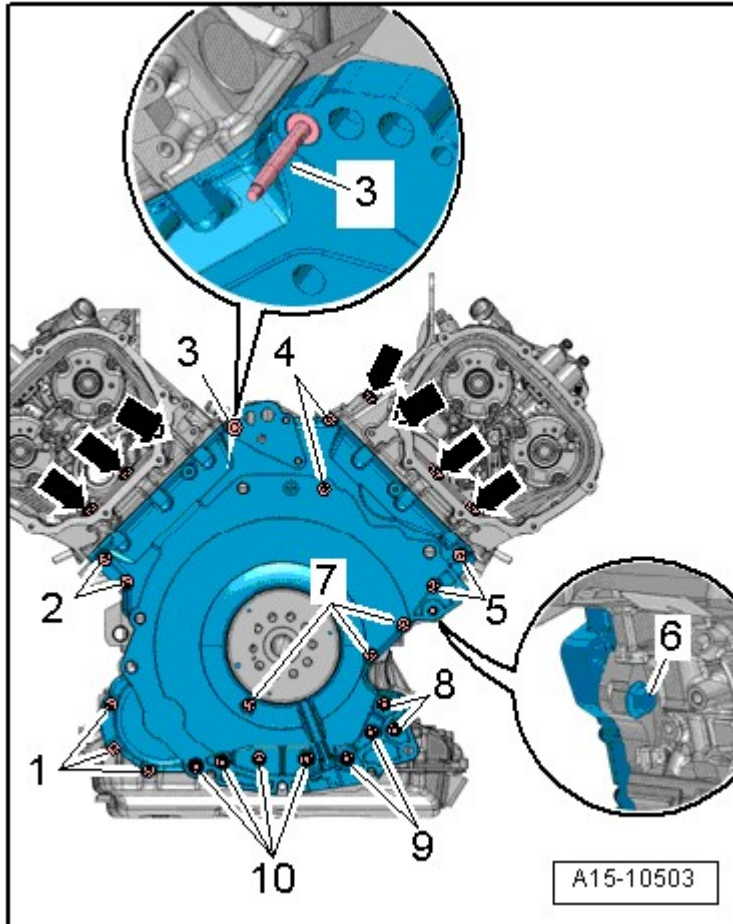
Lower Timing Chain Cover Bolt Tightening Sequence & Specification
